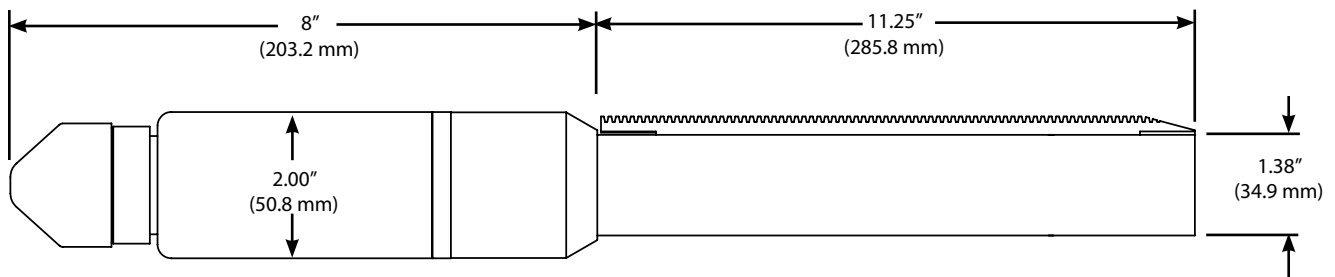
PT-26 "SL" In-line Torch Dimensions
